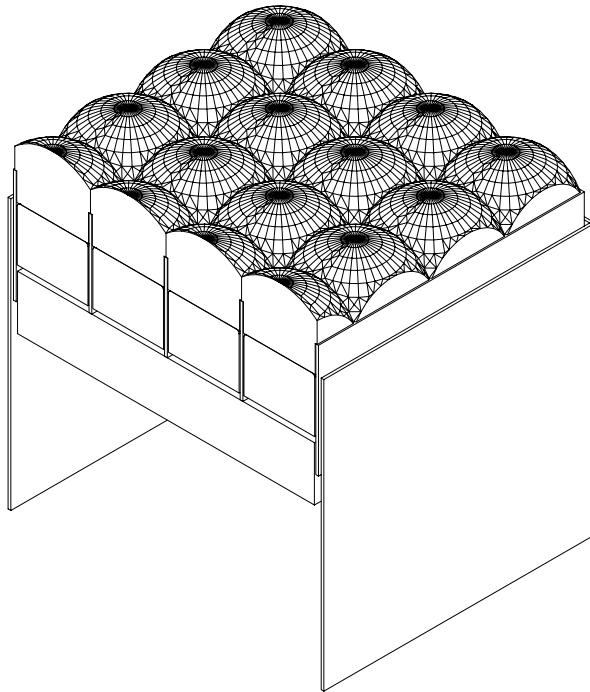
Engineering drawing of a 4×4 MAPMT module.
